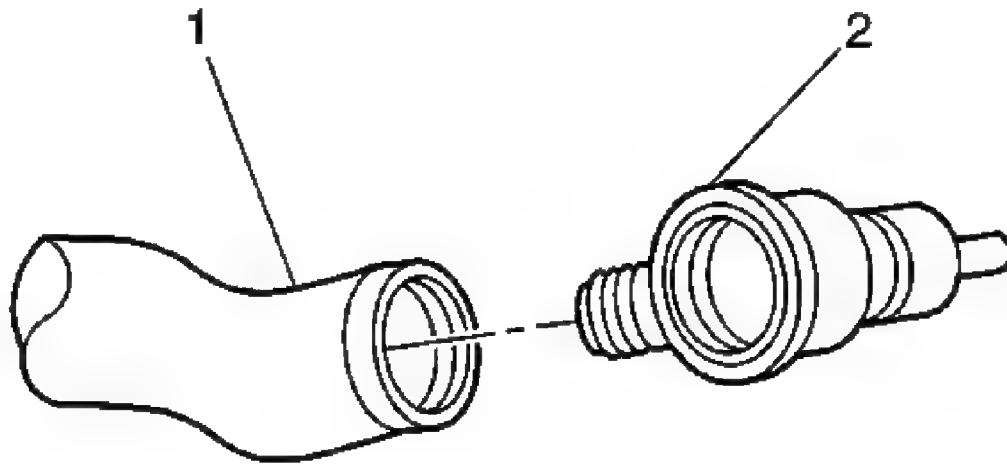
View Of Vacuum Brake Booster Check Valve And Vacuum Brake Booster Hose
